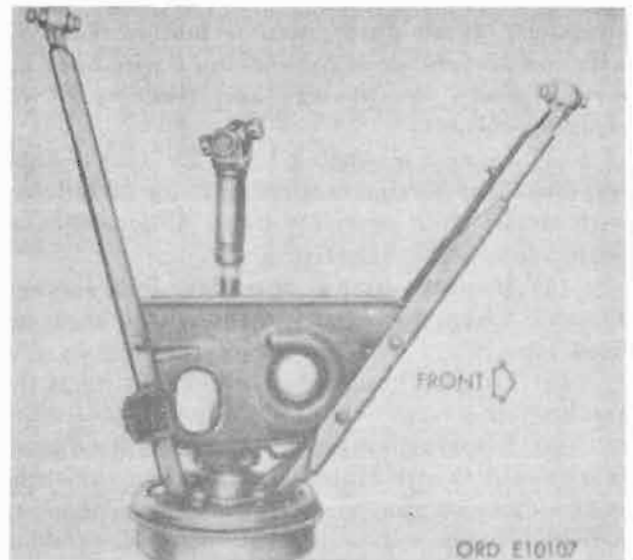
Rear Suspension Arm Assembly—Bottom View (M151, M151A1, M151A1C and M718 Vehicles).
